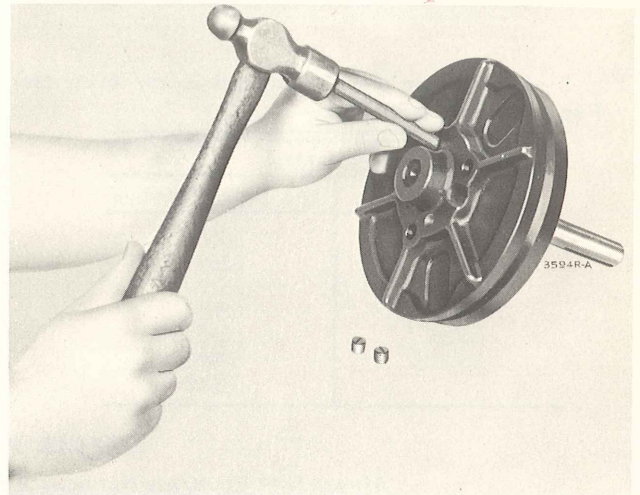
Driving the Free End Bearing Out of the Rotor Assembly
